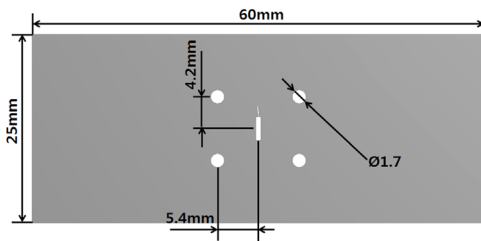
Dimensions of high tension steel plate specimen (Center crack with 4 holes)
